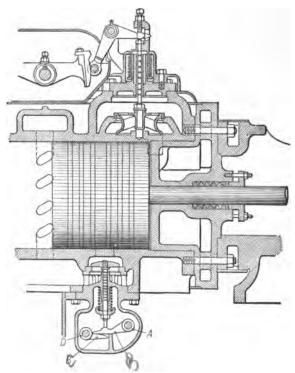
VALVE GEAR OF SKINNER ENGINE.
